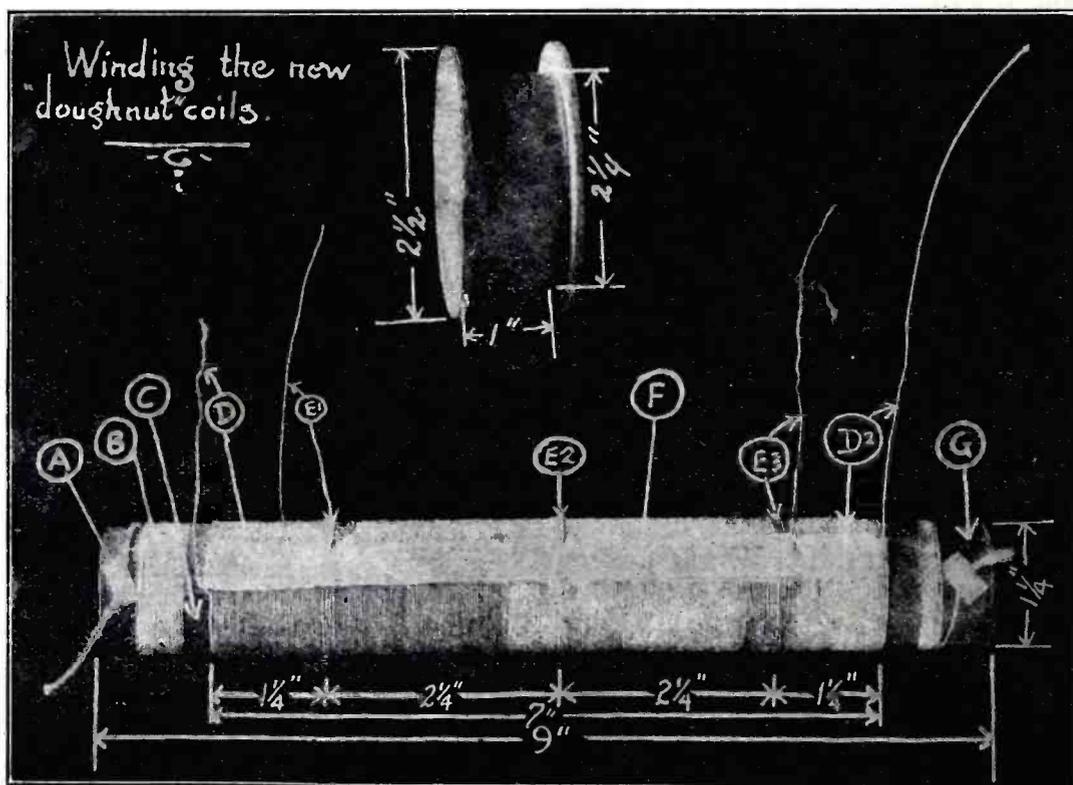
Showing (on top) the spool which constitutes the mount or form on which the coil is placed after being wound, and (lower view) the original form on which the wire is placed prior to removal. The text explains the designations.
